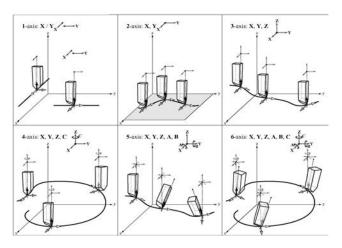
Number of control axes and movement of non-rotational cutting tool.
